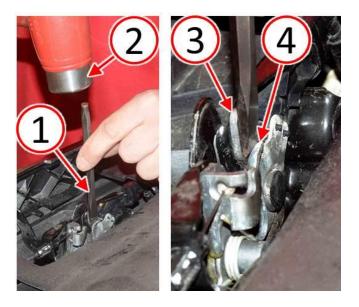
Adjust Hood Latch Ratchet to Latch Cover Plate Clearance
